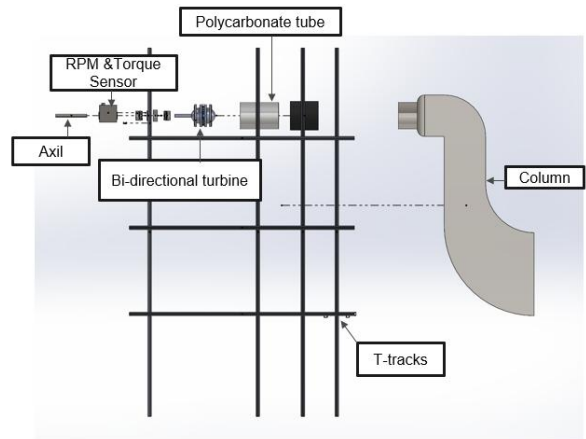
SolidWorks Model of the Redesigned OWC-Turbine Assembly with Instrumentation: Including the Bi-directional Impulse Turbine, Polycarbonate Duct, and Torque Sensor, all Mounted Using Modular T-track Supports.
